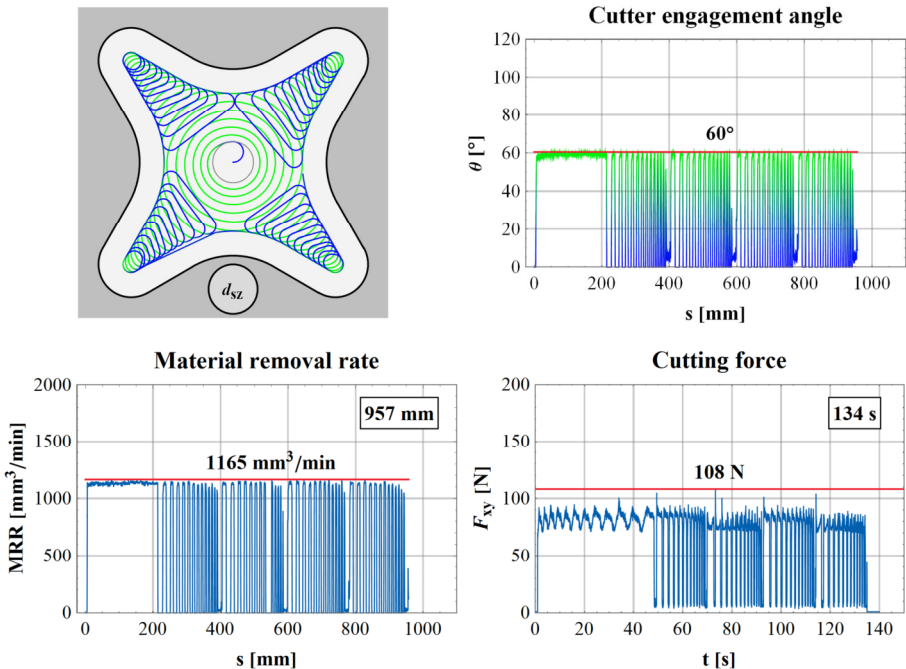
Machining the star-shaped pocket with the developed strategy
